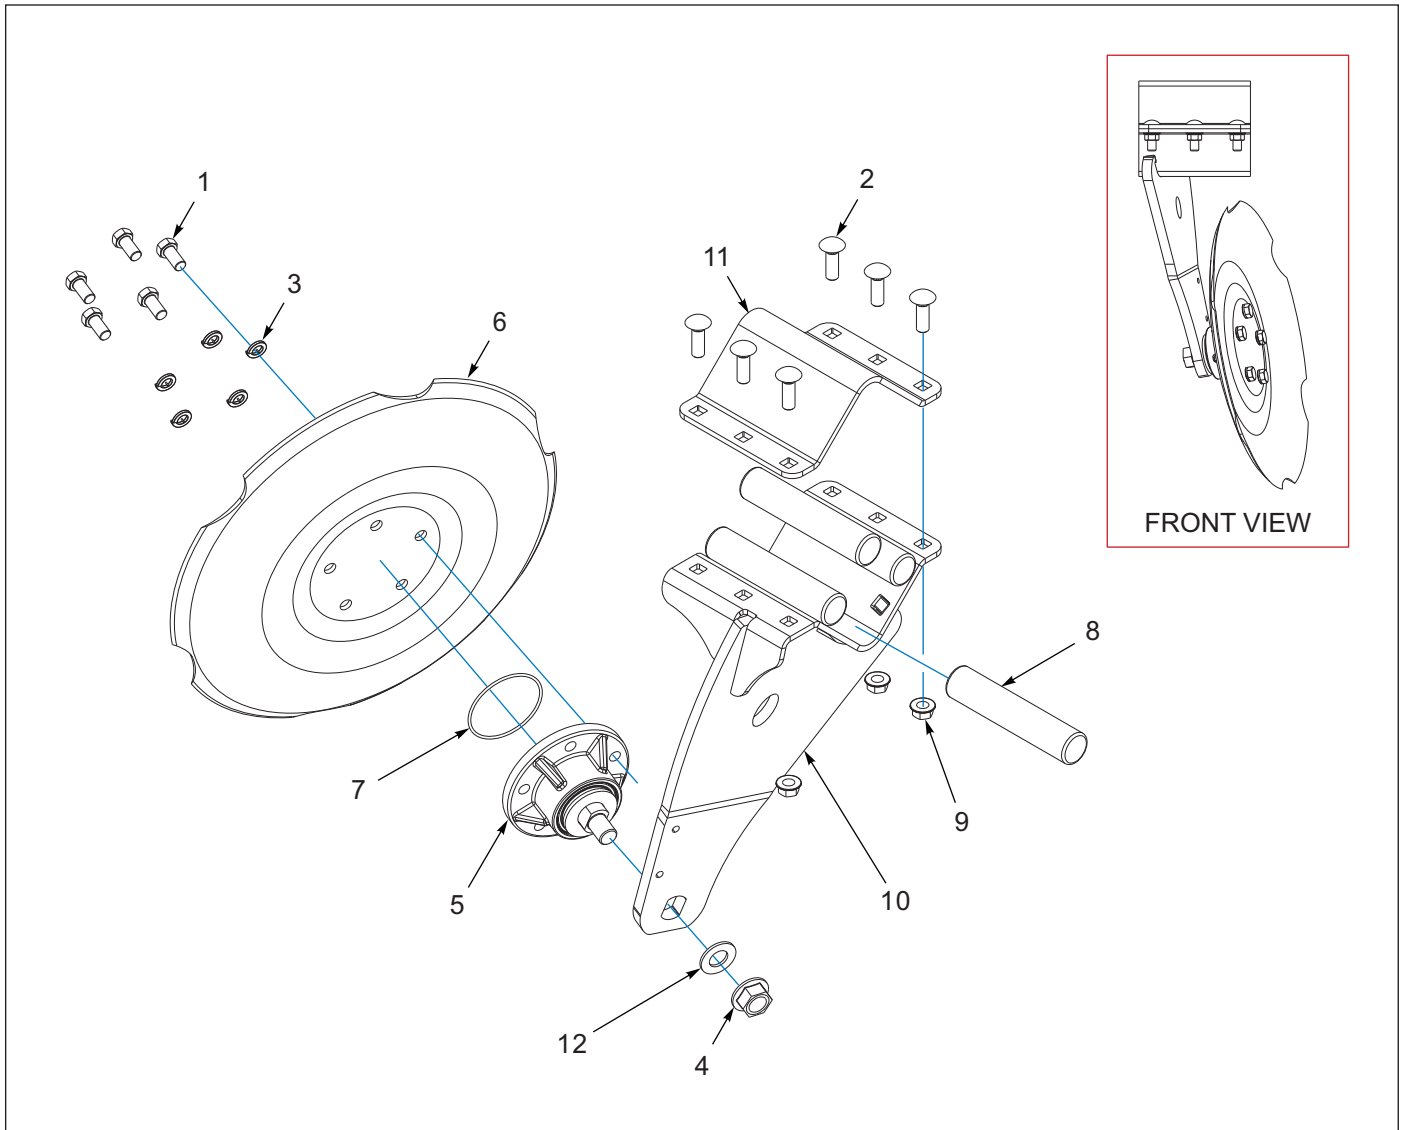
Hybrid Disc Assembly (LH), Notched
